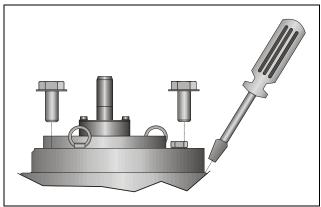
Loosening and removing the hexagon screws on the filter cover
